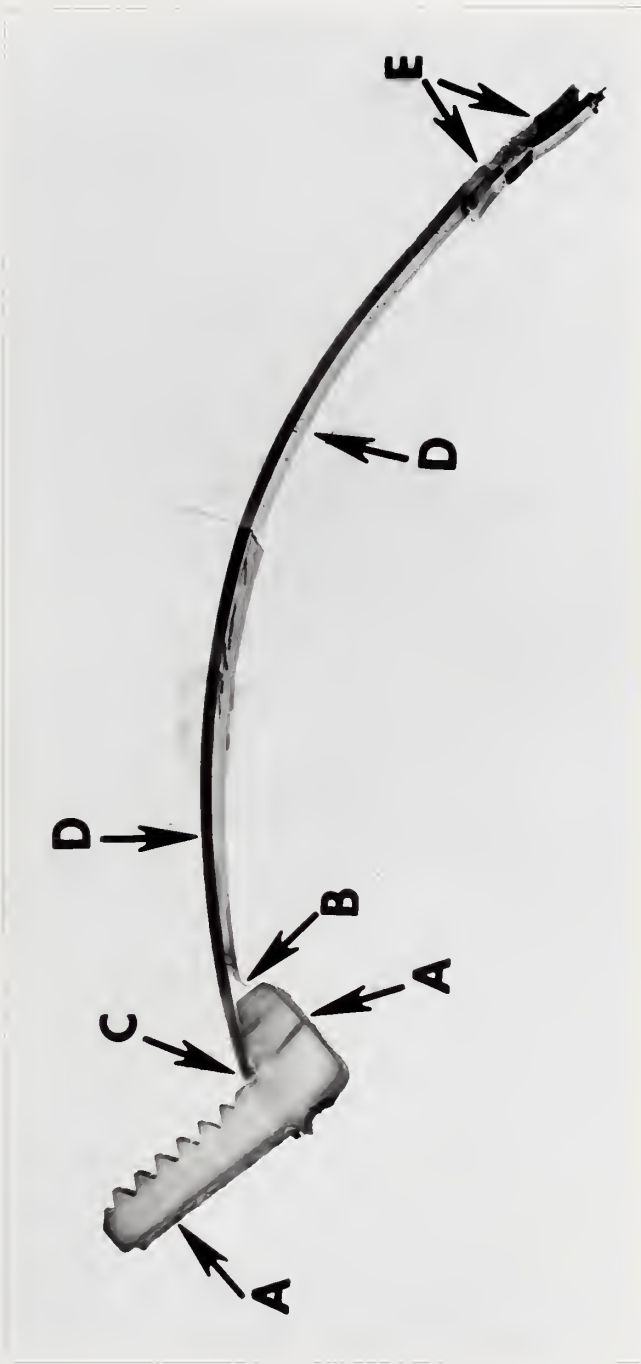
Longitudinal section through dome wall showing collar (A), joining metal (B and C), dome wall (D) and joint between dome wall and shell wall (E).
